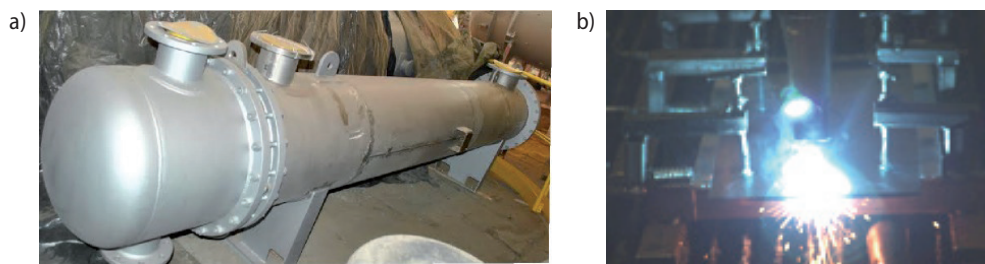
Vapor condenser made of stainless steel 904L with TIG method [Department of Mechanical Chemical Equipment, Tarnów Azote Group] (a), laser welding of steel 904L (b)
